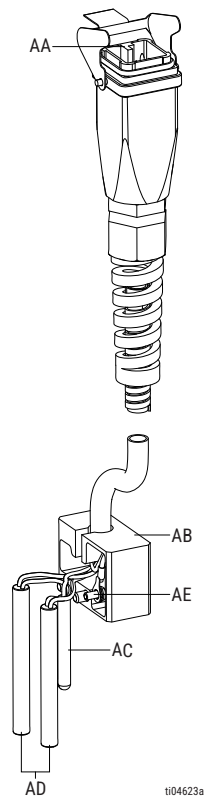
Heater Assembly (for 60 mm Outlet Block), 15N029
